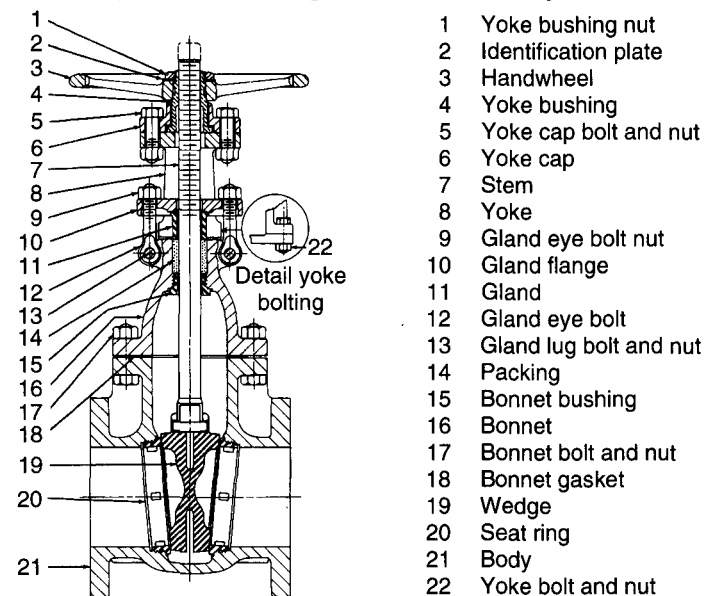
Rising-stem, flanged bonnet, flexible-wedge disk, O.S.&Y. gate valve. Courtesy Crane Company.
